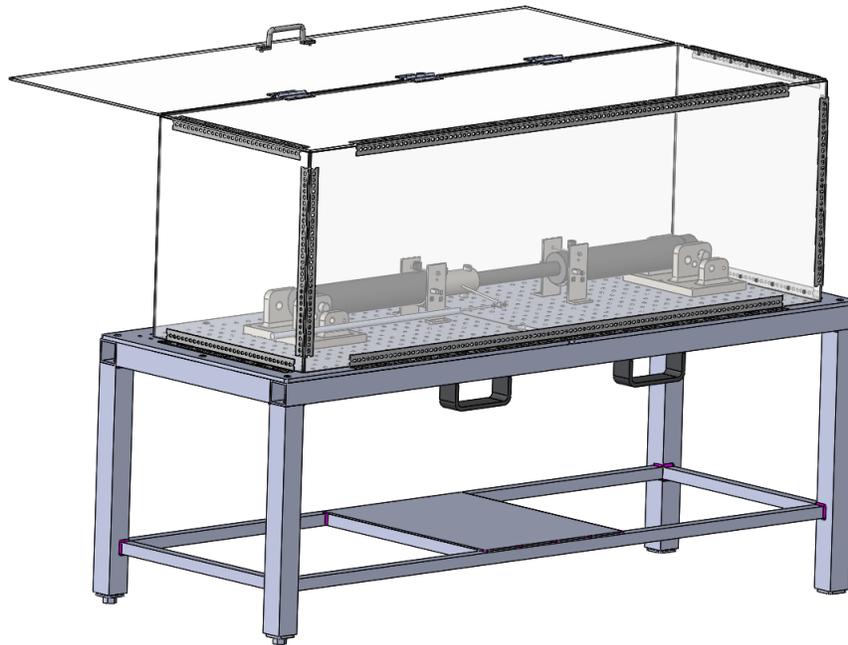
Hydraulic Cylinder Test Apparatus CAD Model
